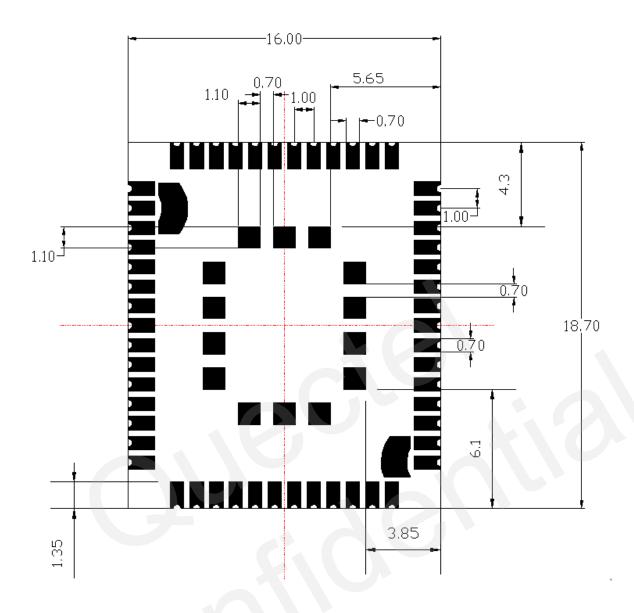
MC60 Bottom Dimensions (Unit: mm)
